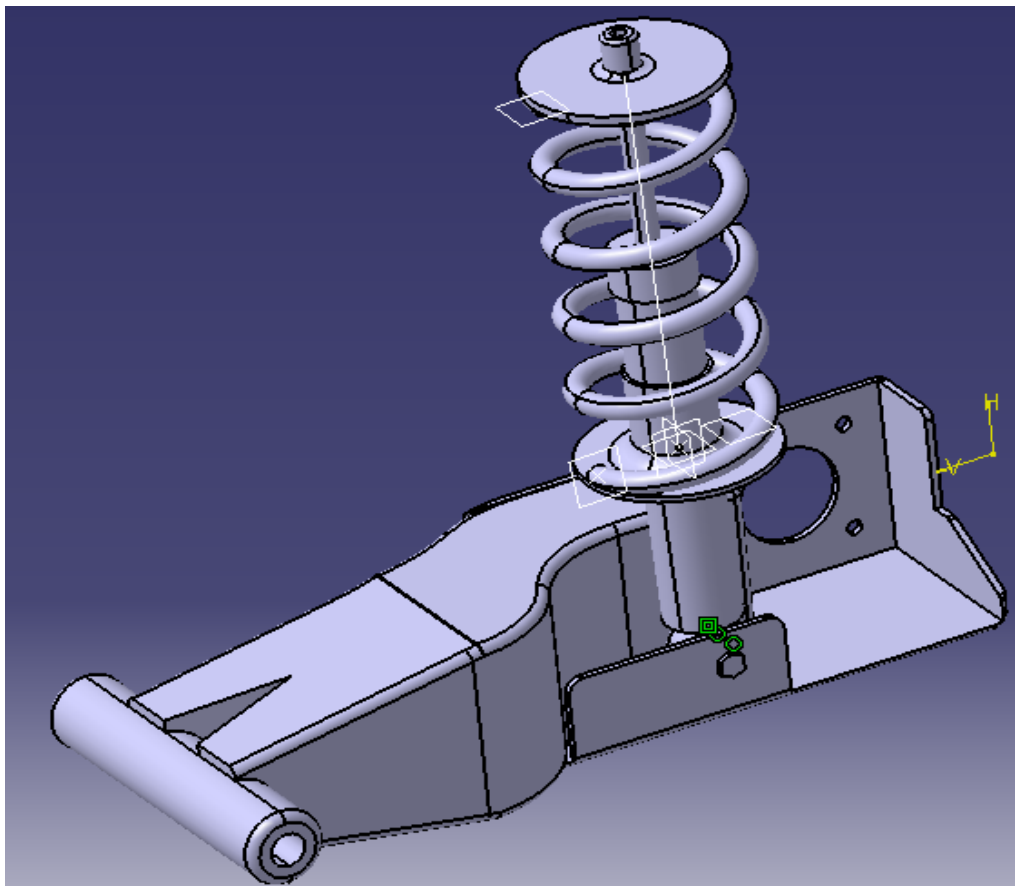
10: Assembly of the Conventional Rear Suspension System
